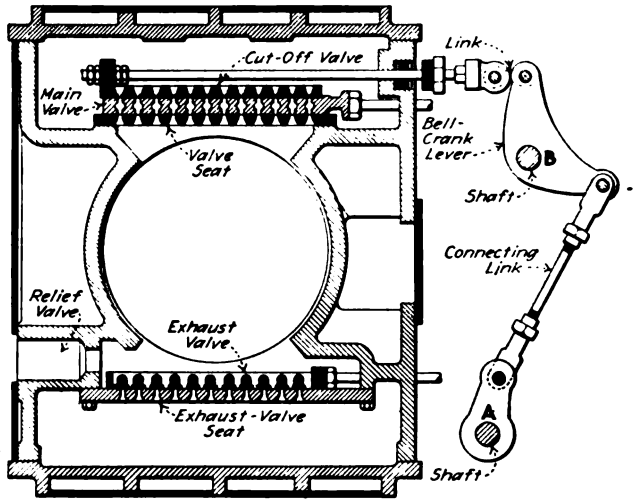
Section through head of McIntosh & Seymour engine showing cut-off-valve operating-mechanism.
